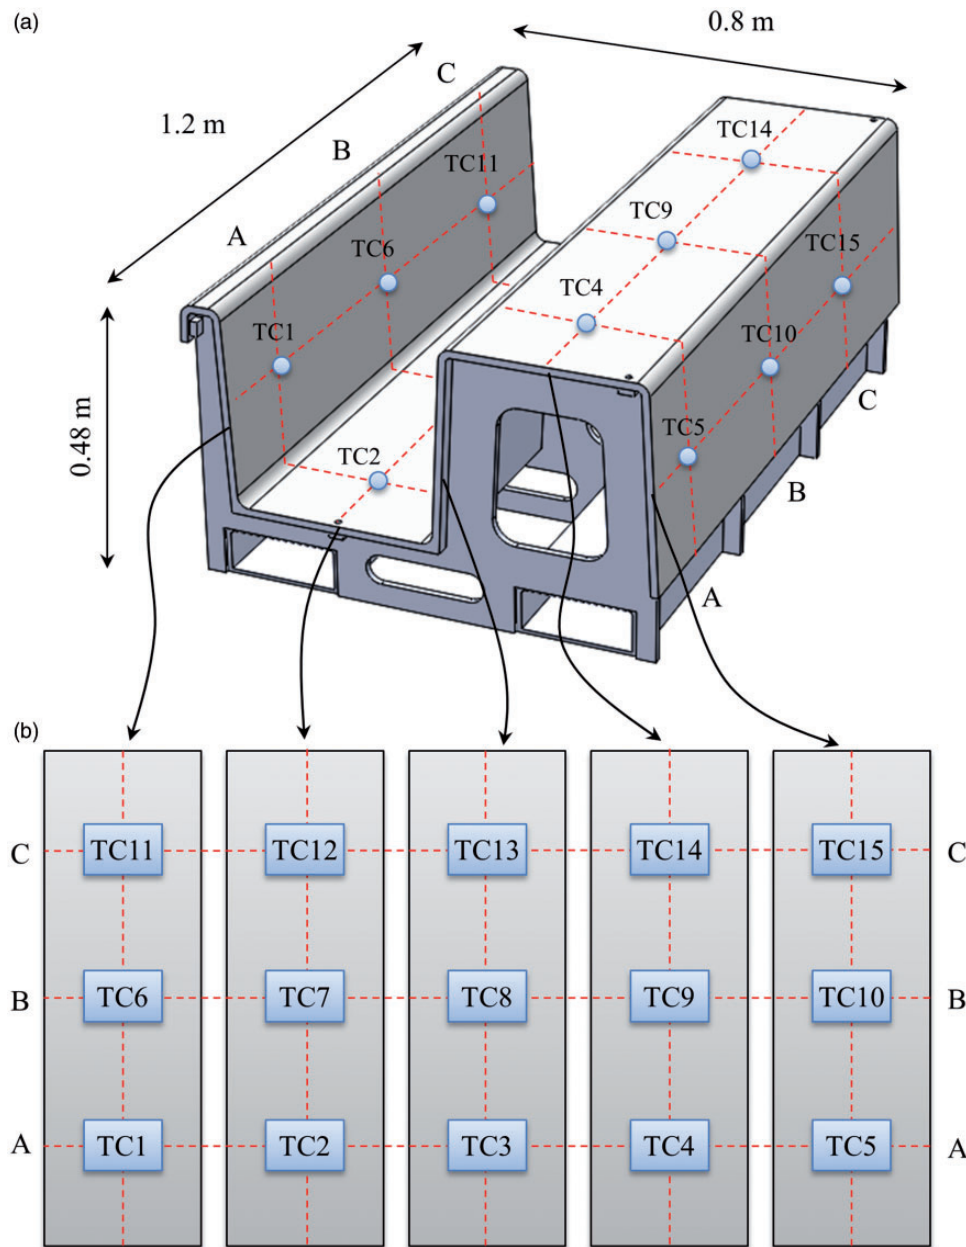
Schematic of locations of 15 thermocouples on the tool surface: (a) Tool isometric view and (b) tool flatten top view.
